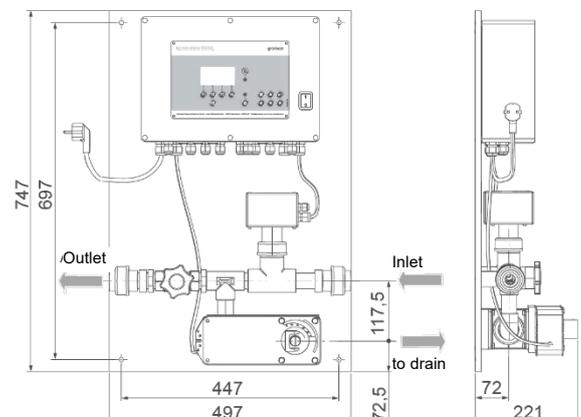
Dimension drawing automatic salt reduction system GENO-KWA-60i
